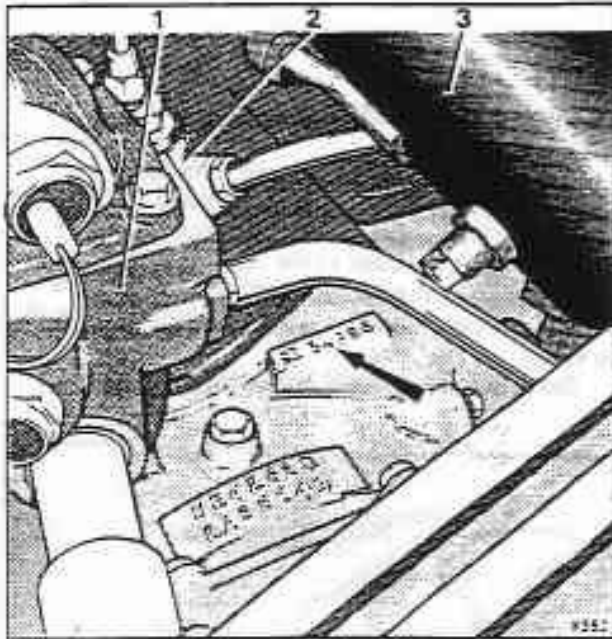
2 Position of the engine build code number (other than turbocharged engines)
